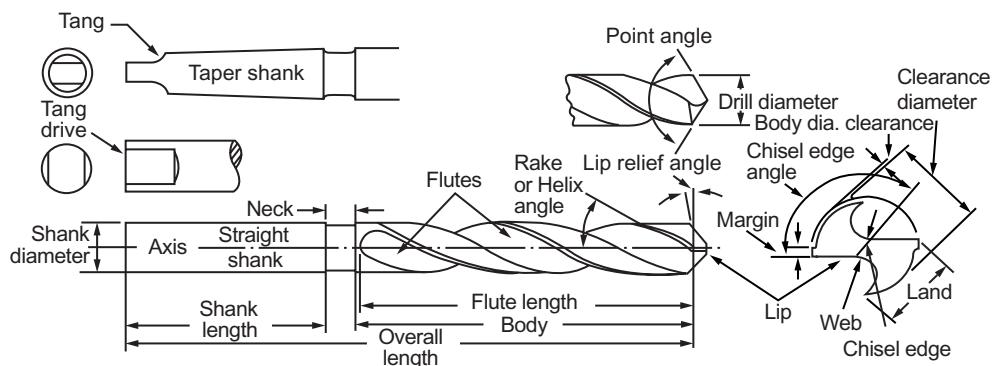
Nomenclature of twist drills. Courtesy: MCTI, *Metal Cutting Tool Handbook*.
